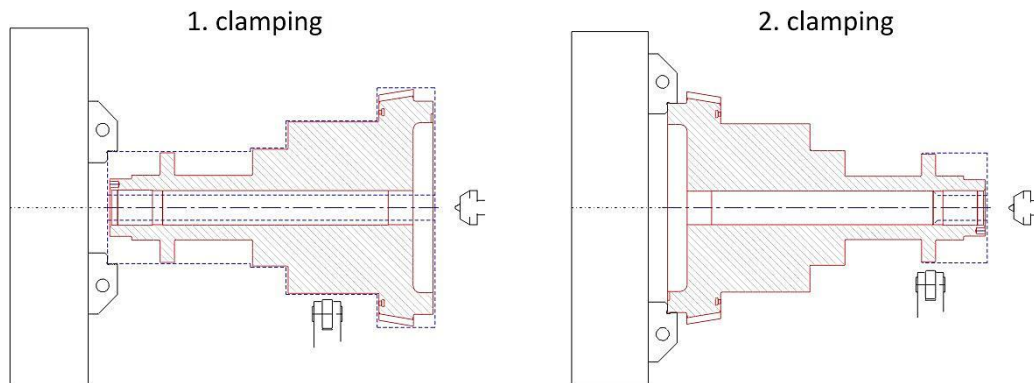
Reduction example of mechanical machining times [Wimmer 2009]
